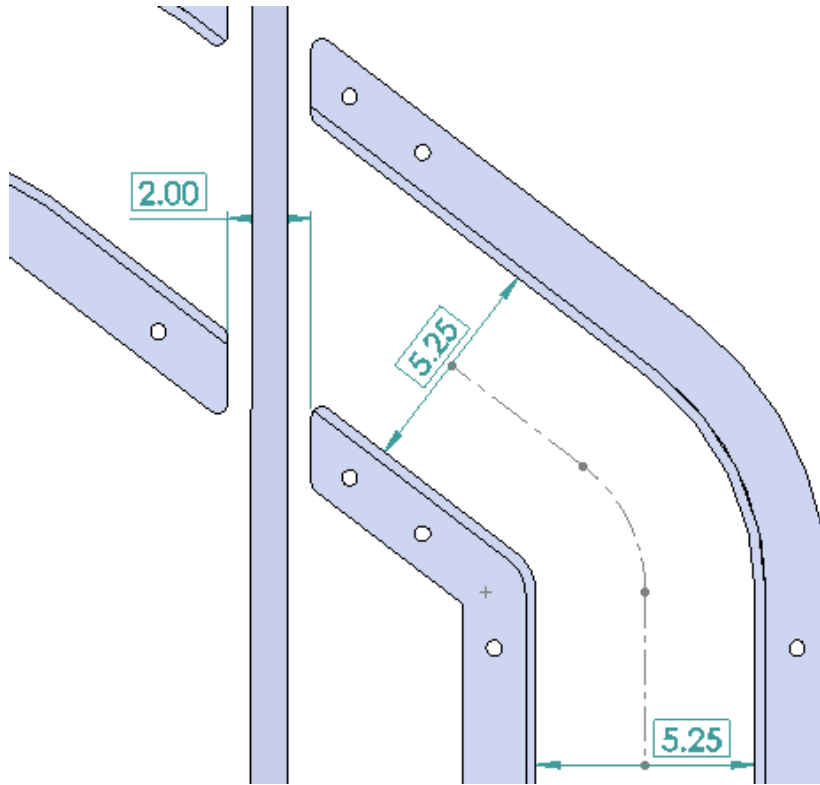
SIDE VIEW OF GUIDE TRACKS NEAR THE TOP INTERSECTION WITH CHAIN PATH. THE SPAN BETWEEN THE INNER AND OUTER SECTIONS OF GUIDE TRACK IS DIMENSIONED IN MULTIPLE PLACES, AND THE GAP FOR THE TRACK-CHAIN INTERSECTION IS DIMENSIONED AS WELL.
